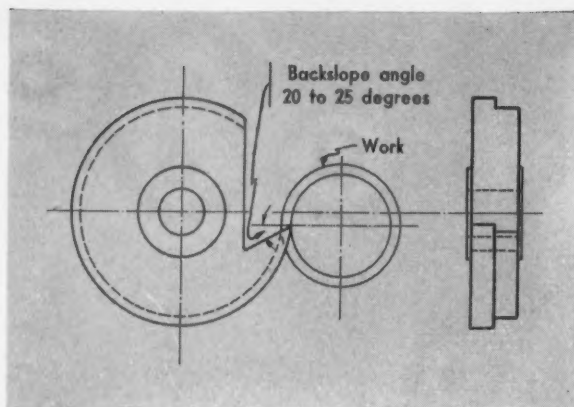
The principles shown in this drawing have been successfully used in making setups for automatic screw machines and form tools in connection with machining magnetic ingot iron.
